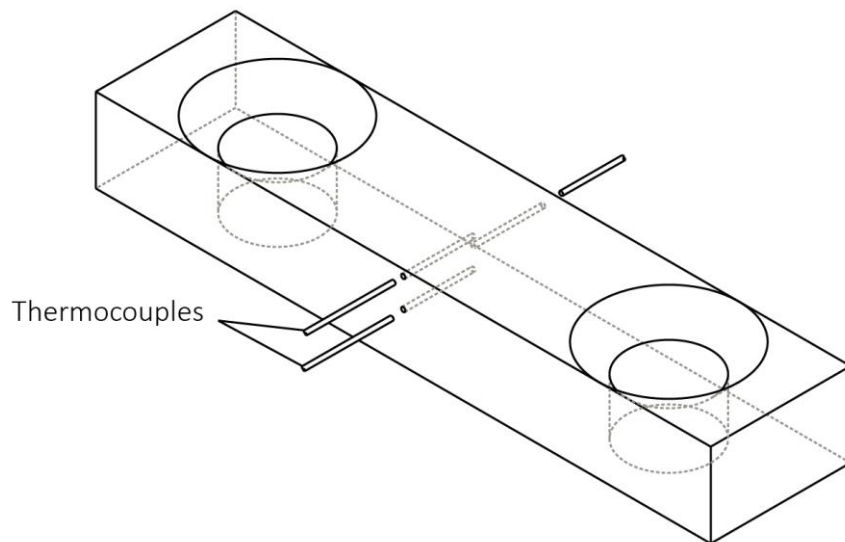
Illustration of the positions of the thermocouples within the flat fretting specimen
